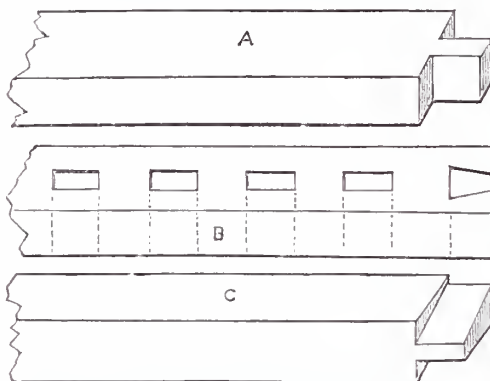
A, Bracing with Tenon. B, Plan of Bottom; same for Top. C, Lining with Dovetail.
